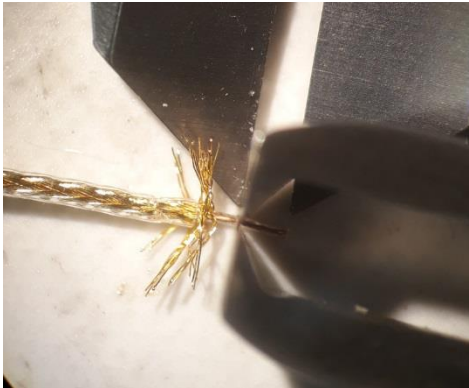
Using the end cutters, carefully remove 1.6 mm of the inner insulation. In the photo to the left the callipers (which are now set to 1.6 mm gap) were used to judge the length of the insulation to be removed
